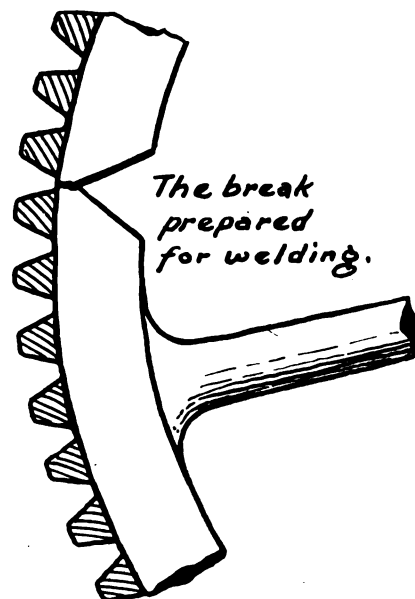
SECTION OF GEAR SHOWING BREAK AFTER IT HAS BEEN PROPERLY PREPARED FOR WELDING
